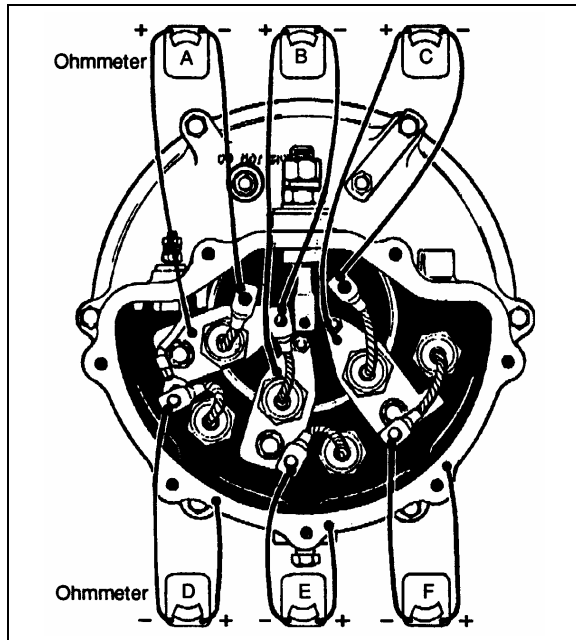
CHECKING DIODES WITH OHMMETER ON A TYPICAL OIL COOLED ALTERNATOR (END COVER REMOVED) 06071
